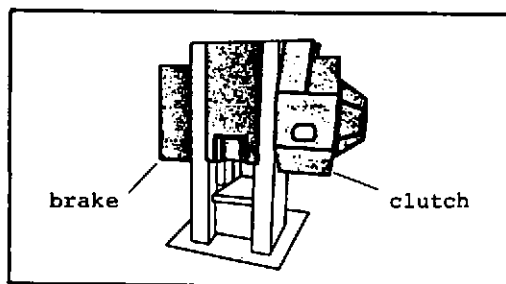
Design of an eccentric press with encapsulated clutch and brake /1/.
